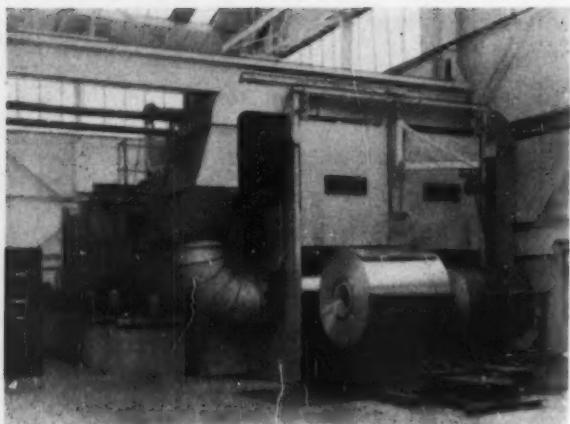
Overall front view of the 166 ft. long roller hearth furnace.
